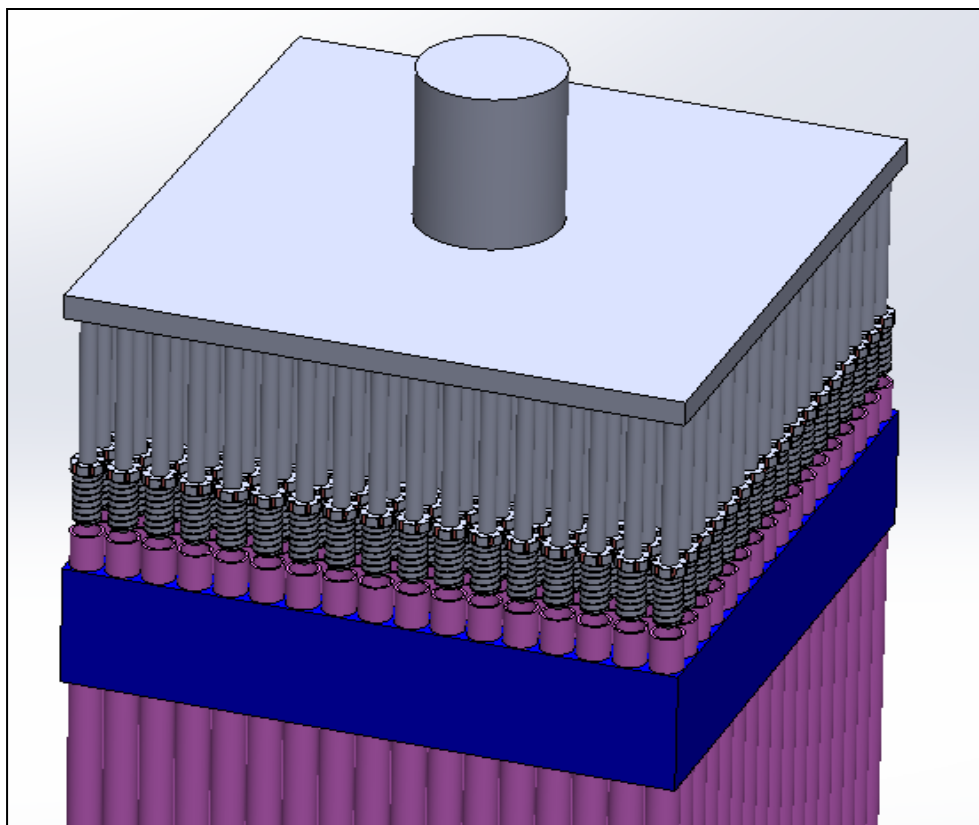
Device used to mechanically cap all of the stainless steel tubes with threaded ends
